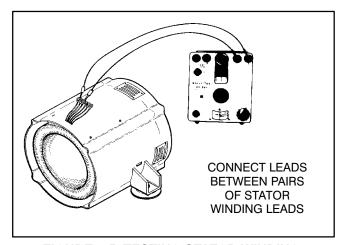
TESTING STATOR WINDING RESISTANCE
